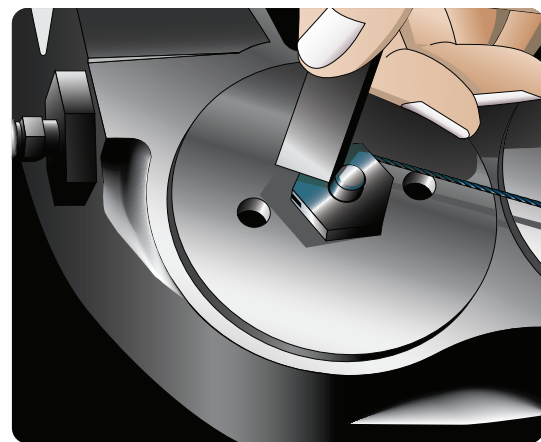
Brake lining wear on a Goodyear brake is ascertained by measuring the wear pin of the automatic adjuster.
